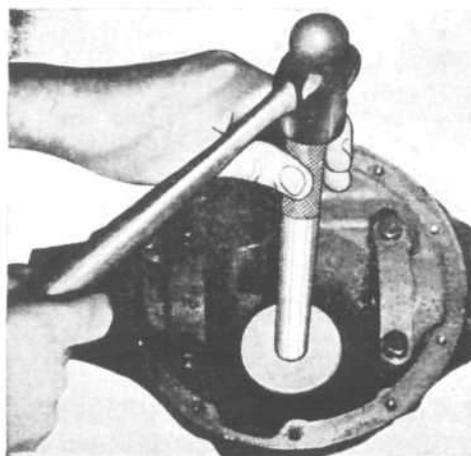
PINION SHAFT REAR BEARING CUP DRIVER
